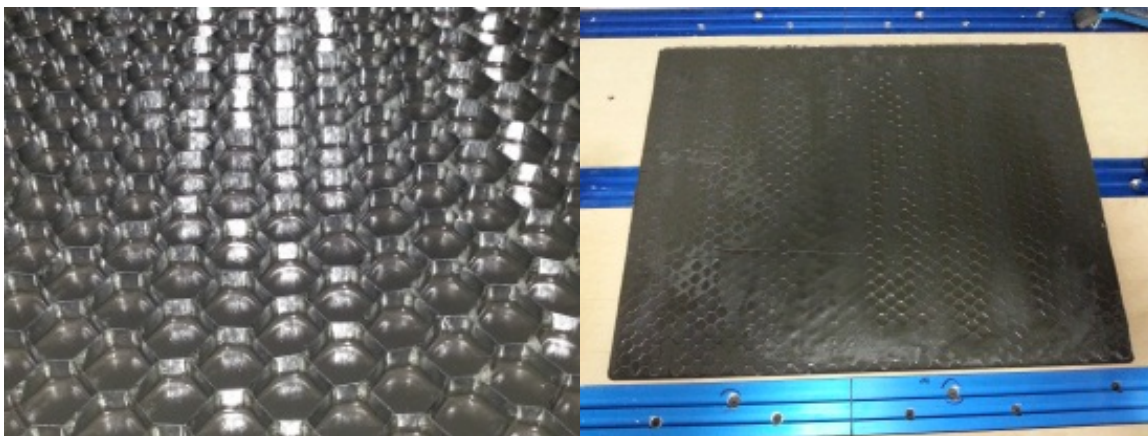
Honeycomb Glued to Mold Sealing the Bottom of Each Cell (Left) and a Filled Sample (Right)
